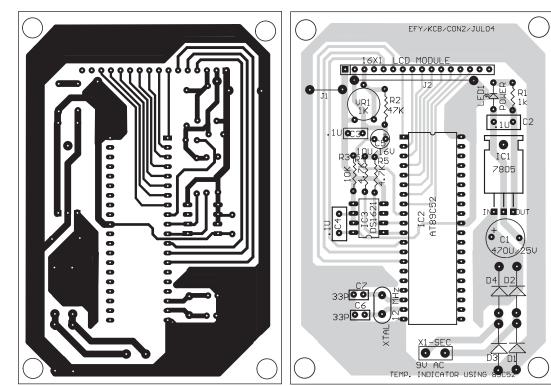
Solder-side PCB layout for temperature indicator using AT8952
